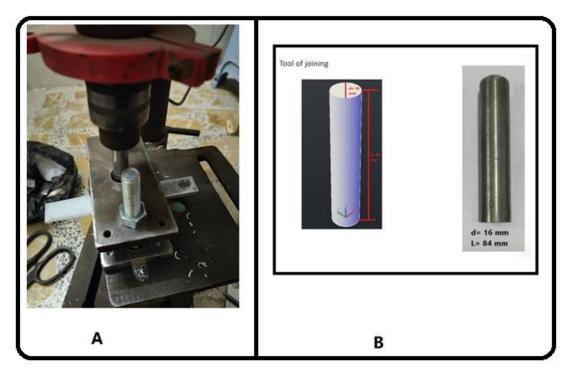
Friction spot welding; A) Picture of friction spot welding process, and B) Tool of joining process
